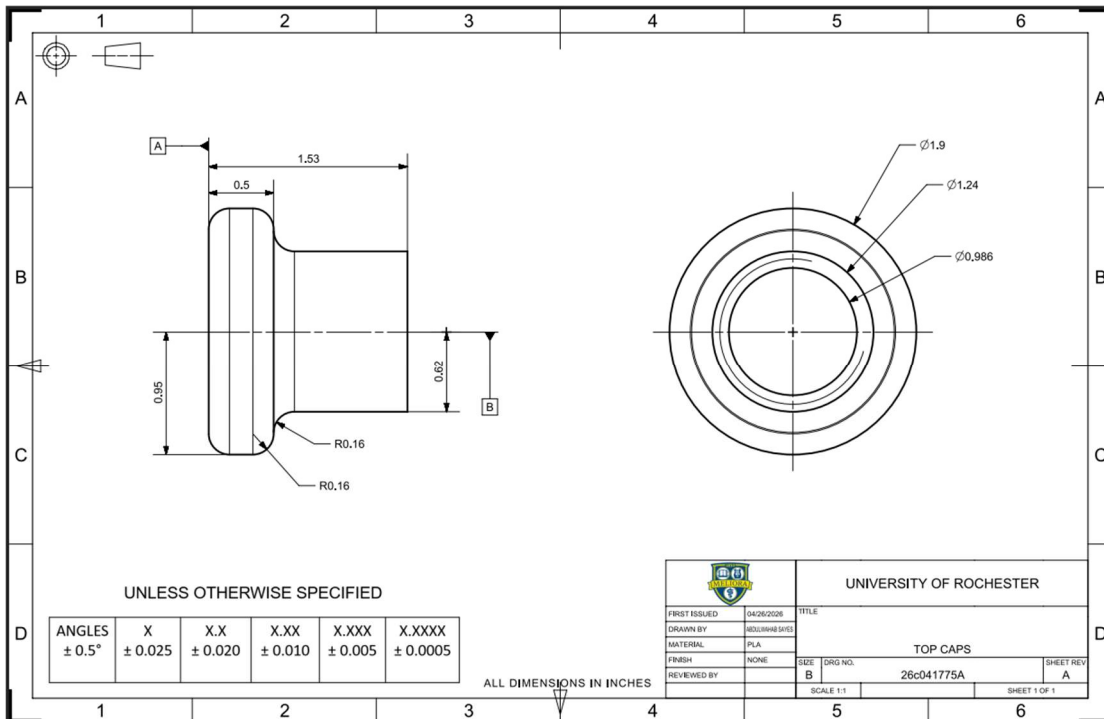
shows the Top caps used to seal the hose on the inlet and the outlet manifolds.
